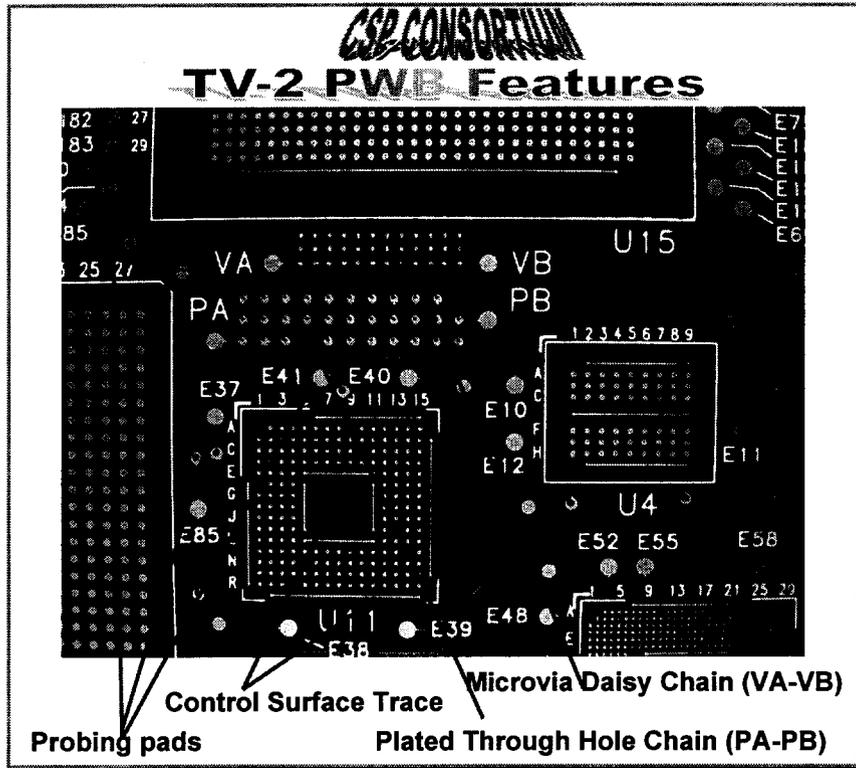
Printed Wiring Board (PWB) showing representative control surface trace for solder volume measurement, probing pads for failure diagnostic, PTH and microvia daisy chain patterns
